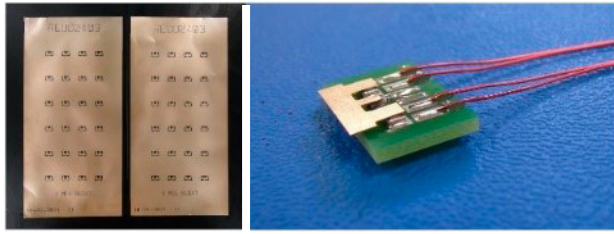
Chemical milling. A singulated chemically milled 0.005-in.-thick beryllium copper is bonded onto a PCB using a thermally conductive, electrically insulative epoxy.
